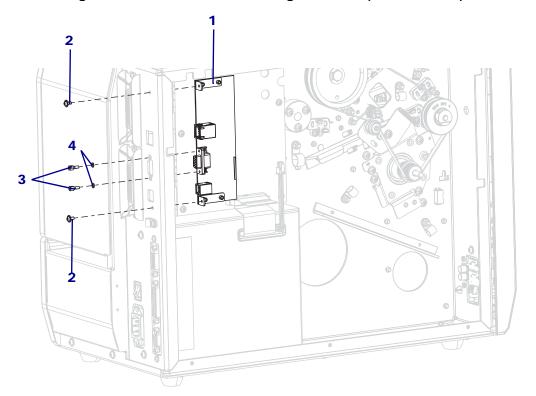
• Remove the Mounting Hardware (ZT600 shown)
